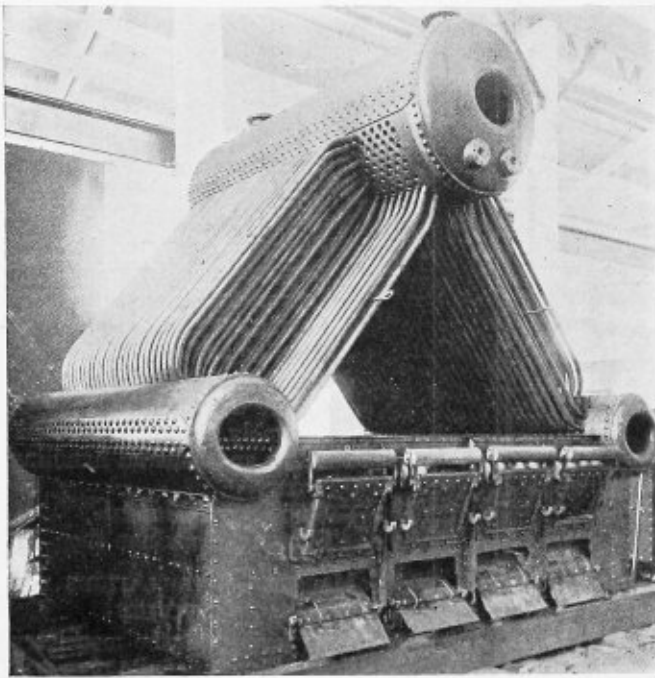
Coal-Burning Ludlum Boiler About Ready for Fitting the Casing
